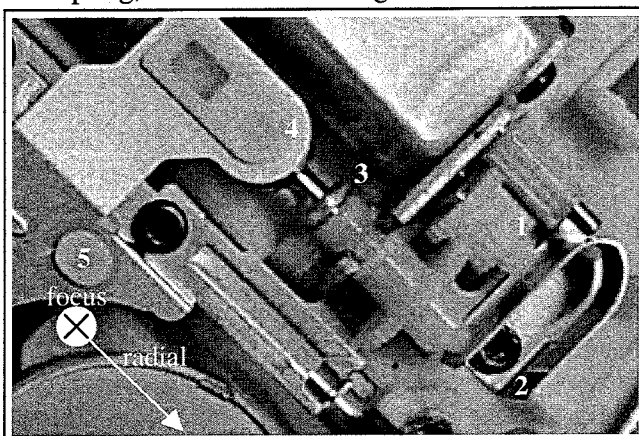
Coupling between electromotor and sledge, with: 1. Gears; 2. Leaf spring; 3. Spindle; 4. Nut; 5. Sledge.
